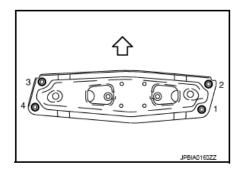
Rear Engine Mounting Member Bolts Tightening Sequence Courtesy of NISSAN MOTOR CO., U.S.A.
